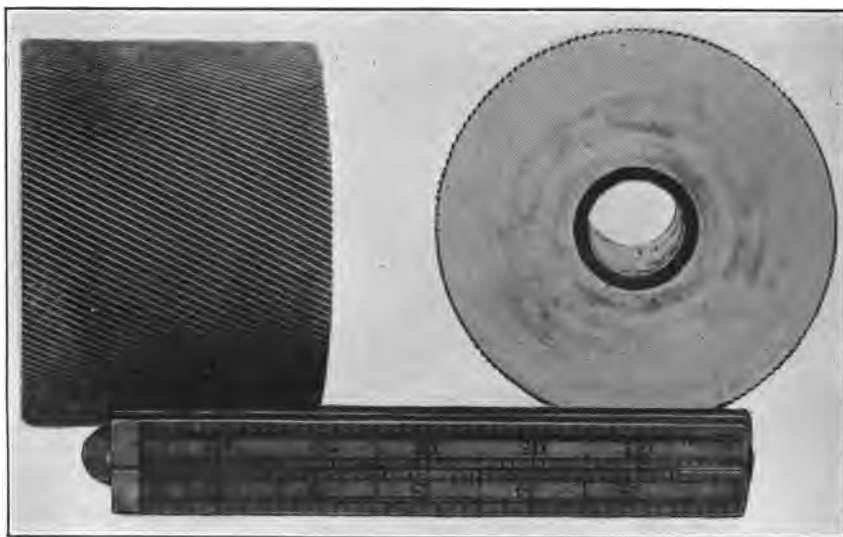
SPIRAL-CUT BURR, TWELVE TO THE INCH.
